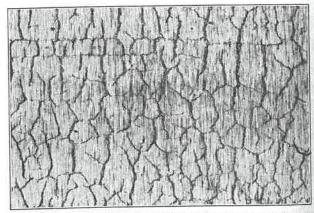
Surface cracking caused by faulty grinding on a carburized Fig. 24 Suriace cracking caused by raunty grinding on a carourized and hardened 1020 steel guidepin. This type of surface on a part subjected to high stress will lead to early failure. (×11)
